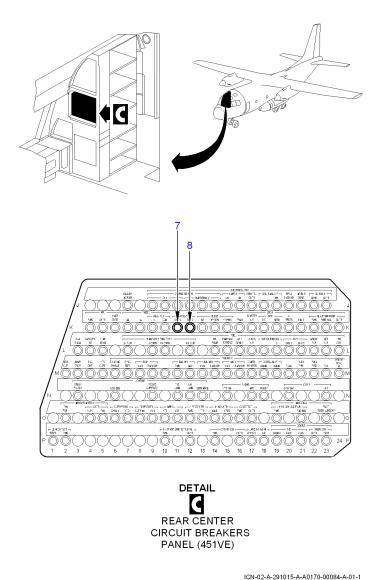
Engine Driven Pump - Removal and Installation (sheet 2/5)
